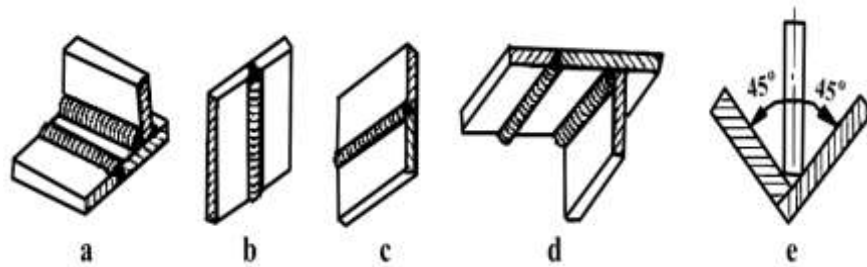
Possible space positions of welding: a-down (flat); b-vertical; c-horizontal; d-inverted (overhead); e-in-corner
